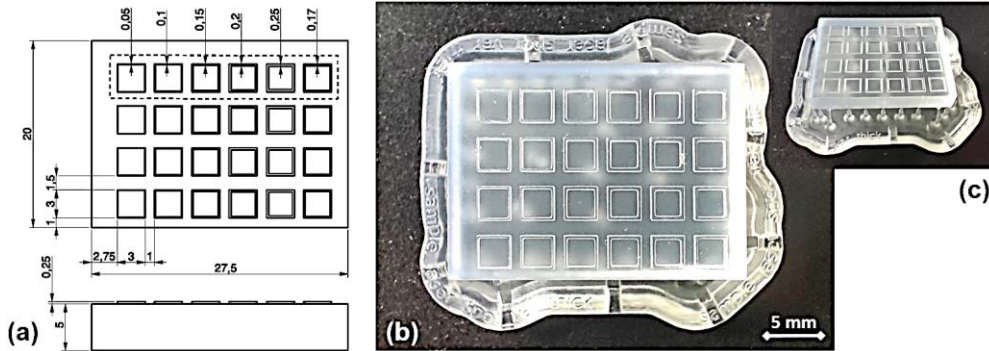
Test part for the measurement of the correction parameter. Drawing (a); top view (b) and 3D view of the printed part samples (c).
